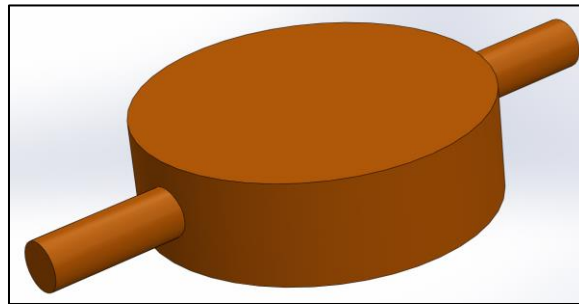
Sketch of a molded material with the solidified filling ports attached
